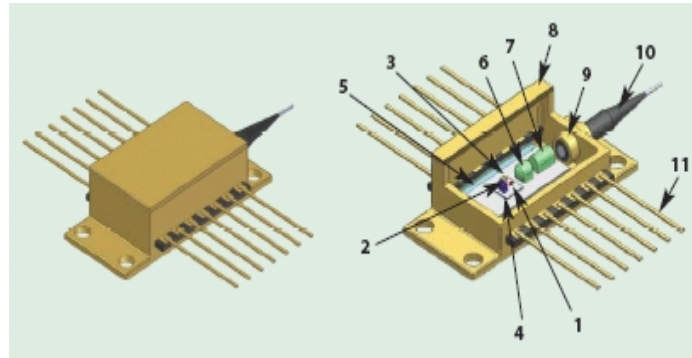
Butterfly package for showing laser chip (1), monitor photodiode (2), thermistor (3), chip carrier (4), thermoelectric cooler (5), lens (6), optical isolator (7), component package (8), window for light output (9), fiber pigtail (10) and electrical leads (11)
